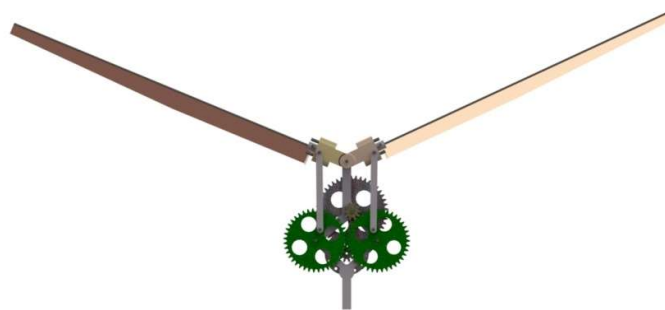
Front View of Flapping Mechanism with rotation about span axis (Rotation angle)
